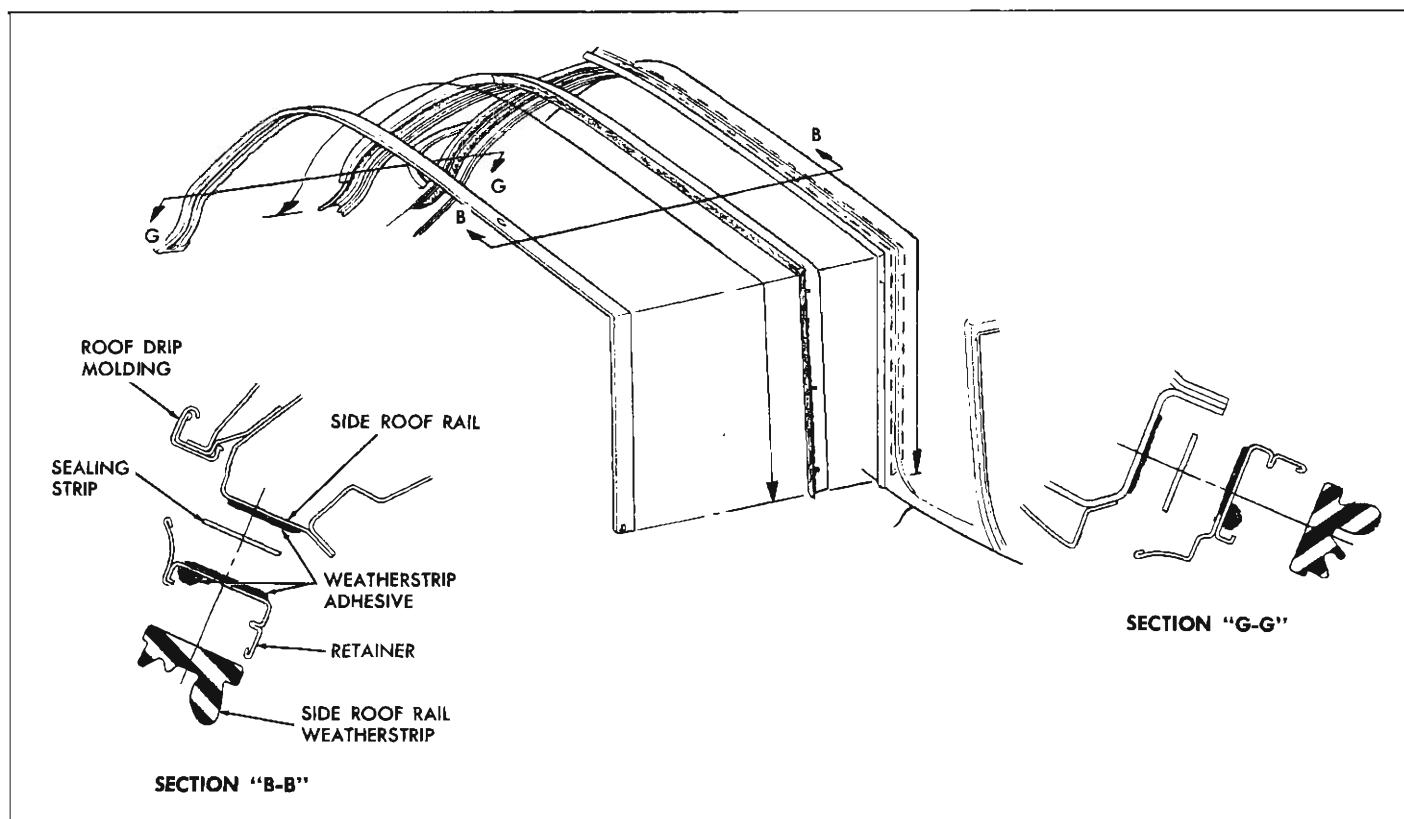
"47" and "39" Style Roof Rail Weatherstrip Assembly
